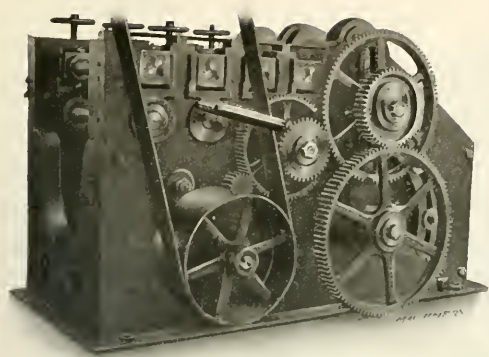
Opposite Side of Sleeper & Hartley No. 5 Spring Coiler shown in Fig. 1
